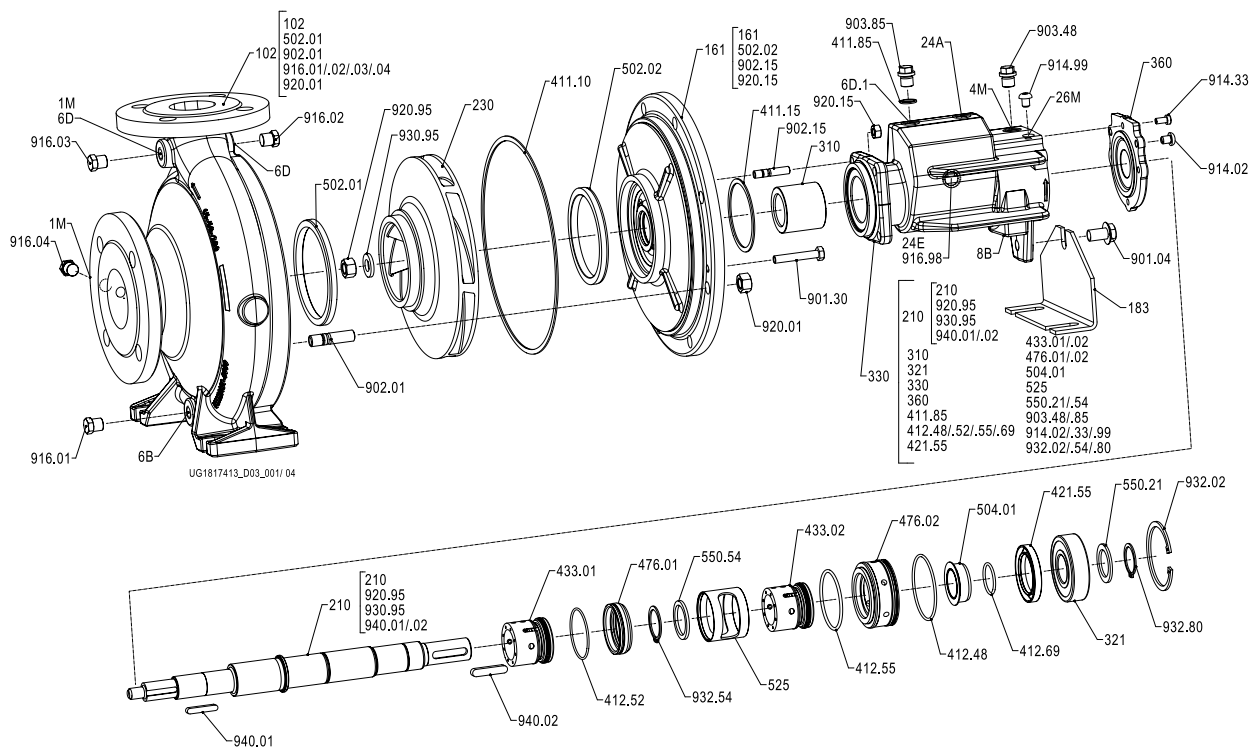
Exploded view of an Etanorm SYT; bearing bracket WS_25_LS with double mechanical seal (special design)
